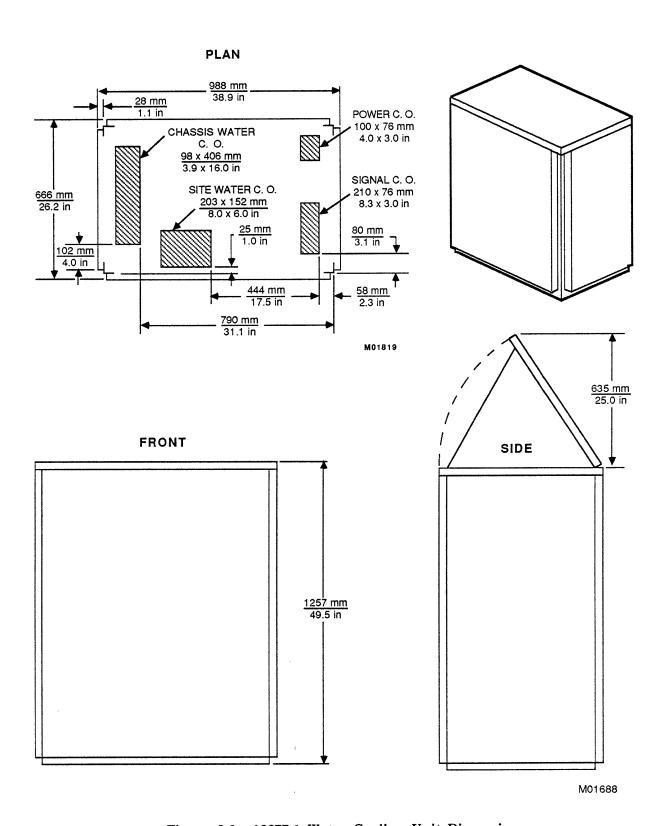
18677-1 Water Cooling Unit Dimensions
